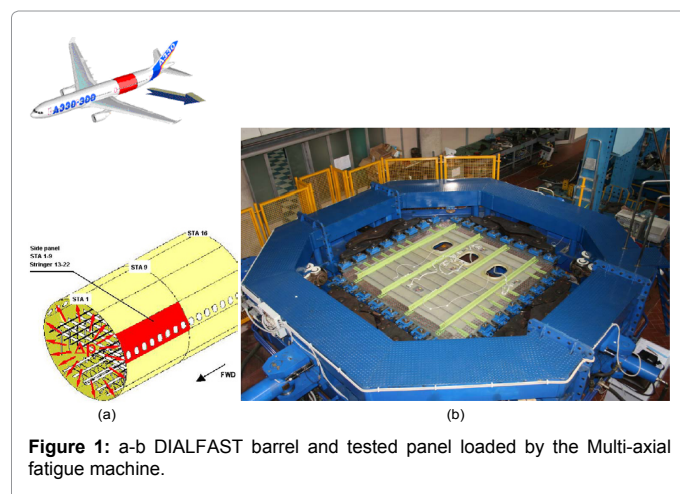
a-b DIALFAST barrel and tested panel loaded by the Multi-axial fatigue machine.
